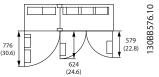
Space in front of IP21/IP54 enclosure type, frame size F12
